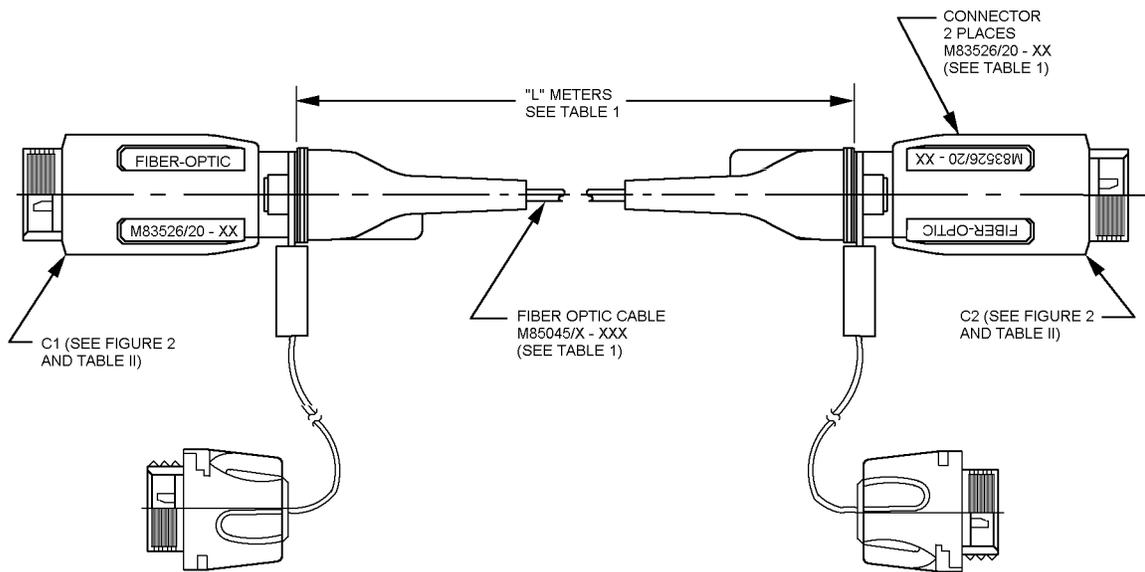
Outline drawing, cable assembly (hermafroditic) fiber optic.
